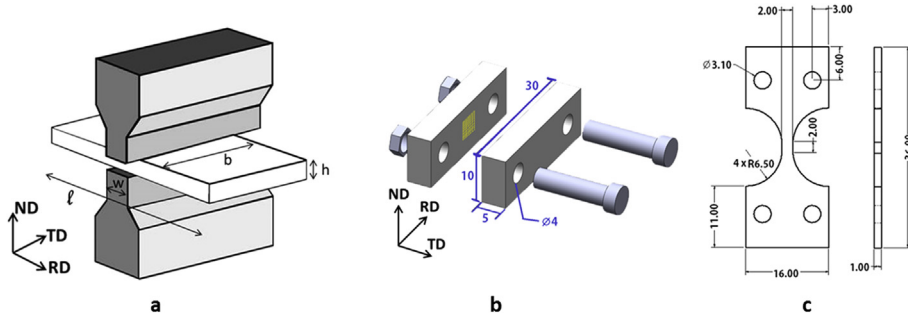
(a) Plane Strain Compression (PSC) test geometry, (b) PSC specimen geometry for steel (units in mm) and (c) tensile specimen geometry.
